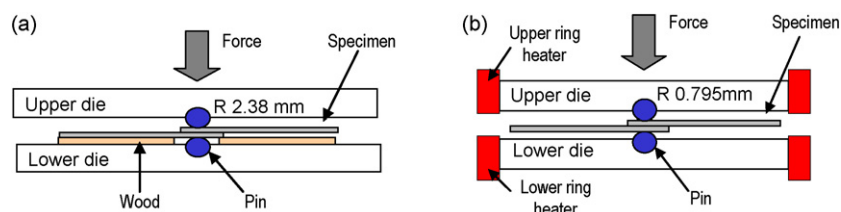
Mechanical joining test apparatus for (a) cold pressure welding and (b) warm pressure welding.
